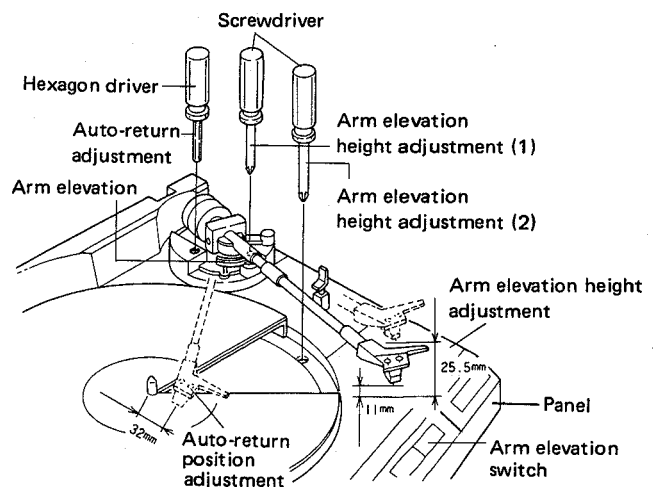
Arm elevation height adjustment and auto-return adjustment
